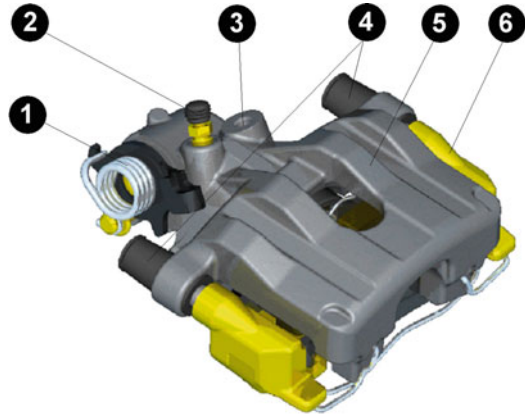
Continental FN fist caliper: 1 brake disk, 2 brake pistons, 3 hydraulic coupling, 4 bushings, 5 caliper frame, 6 frame
